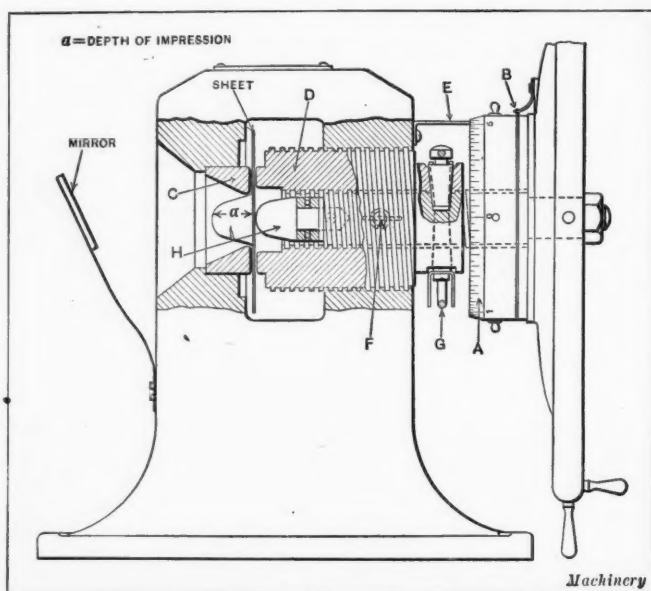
Partial Cross-sectional View of Machine, showing Arrangement of Die, Tool and Holder in which Specimen is secured
